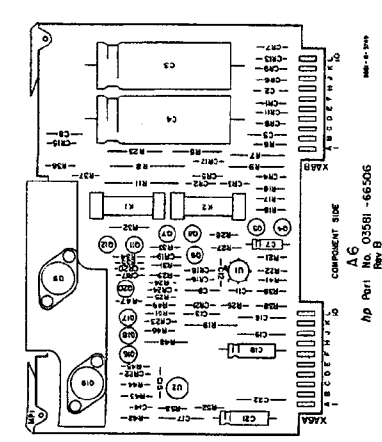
Power Supply Assembly (A6) Schematic and Component Location Diagram.
